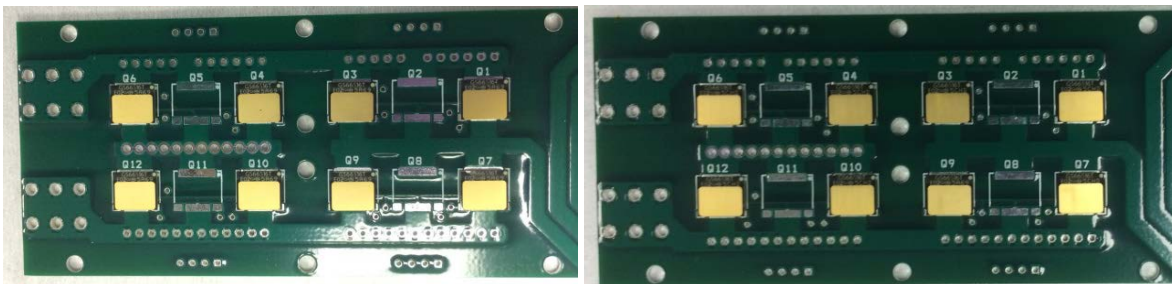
Two packaged GaN MOSFET power phase legs (eight MOSFETS each) for assembly of a GaN charger converter (project EDT 054).
